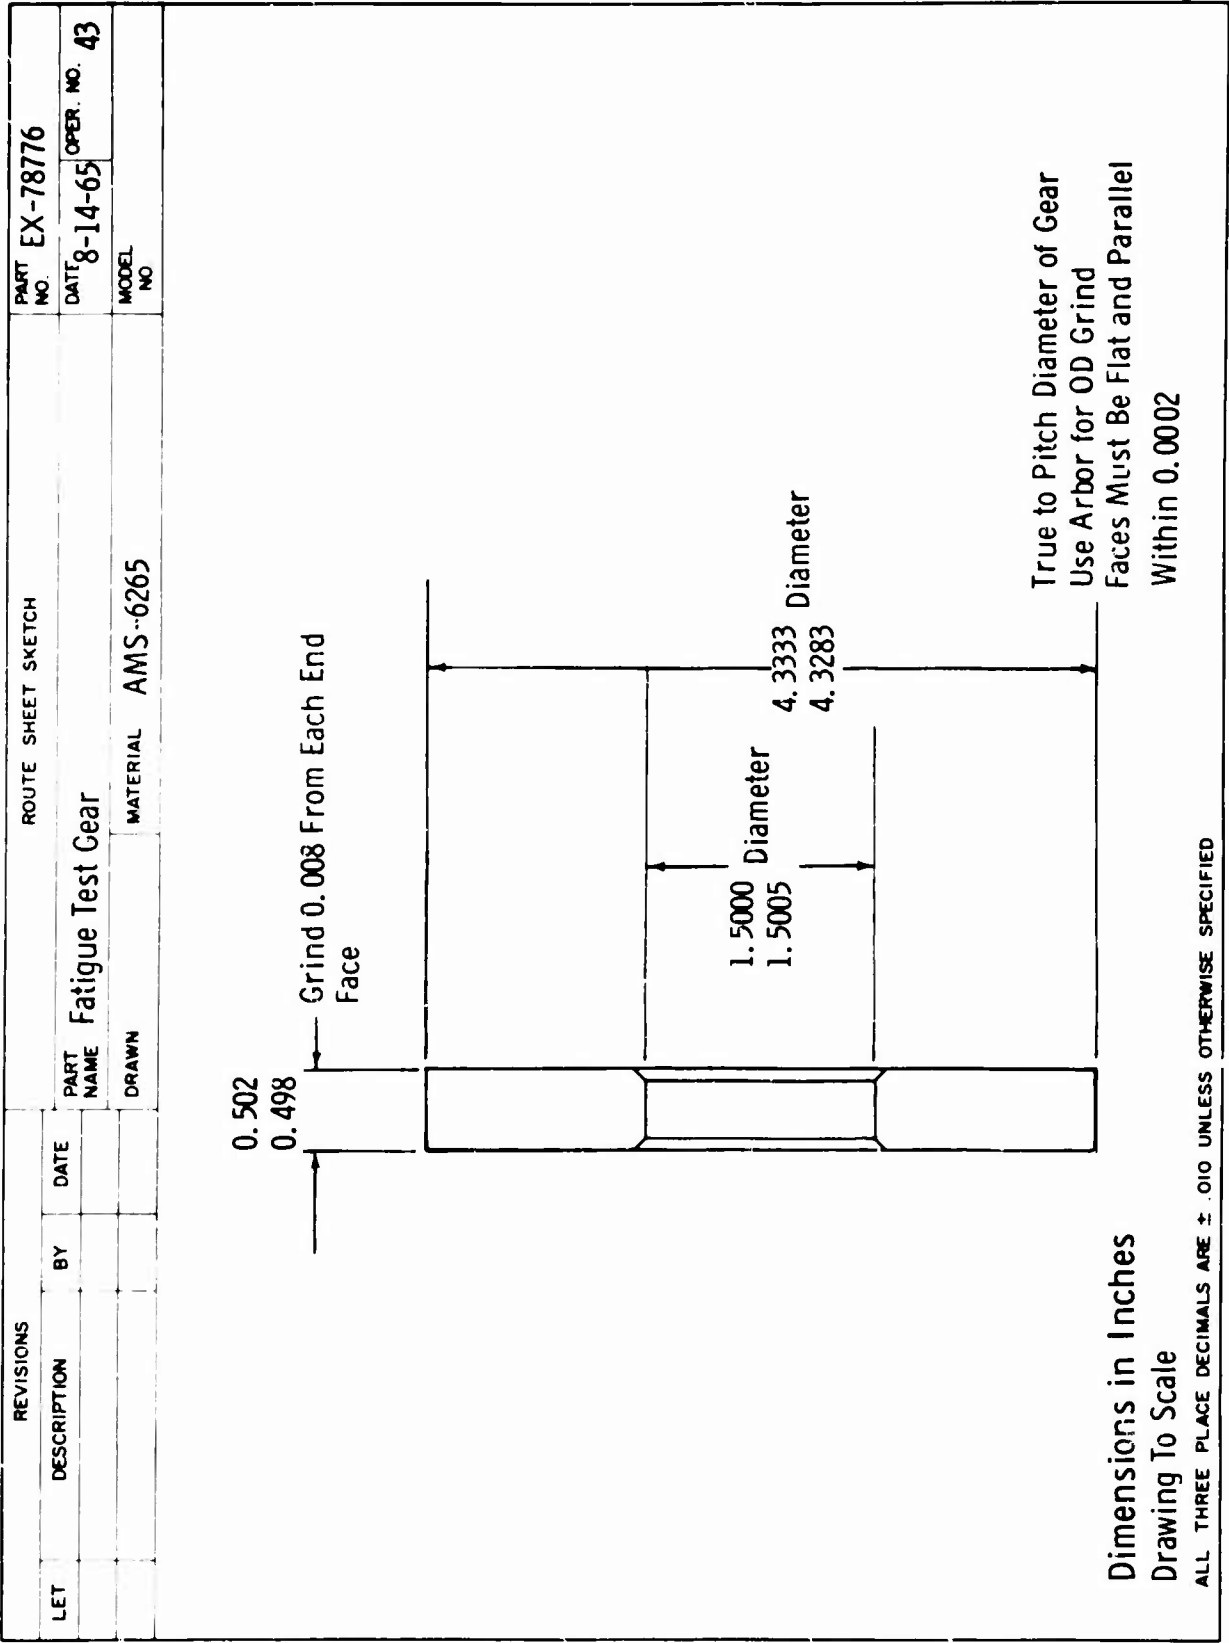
Typical Routing Sheet for Protuberant Hobbed Gear, EX-78776 (Sheet 9 of 9).
